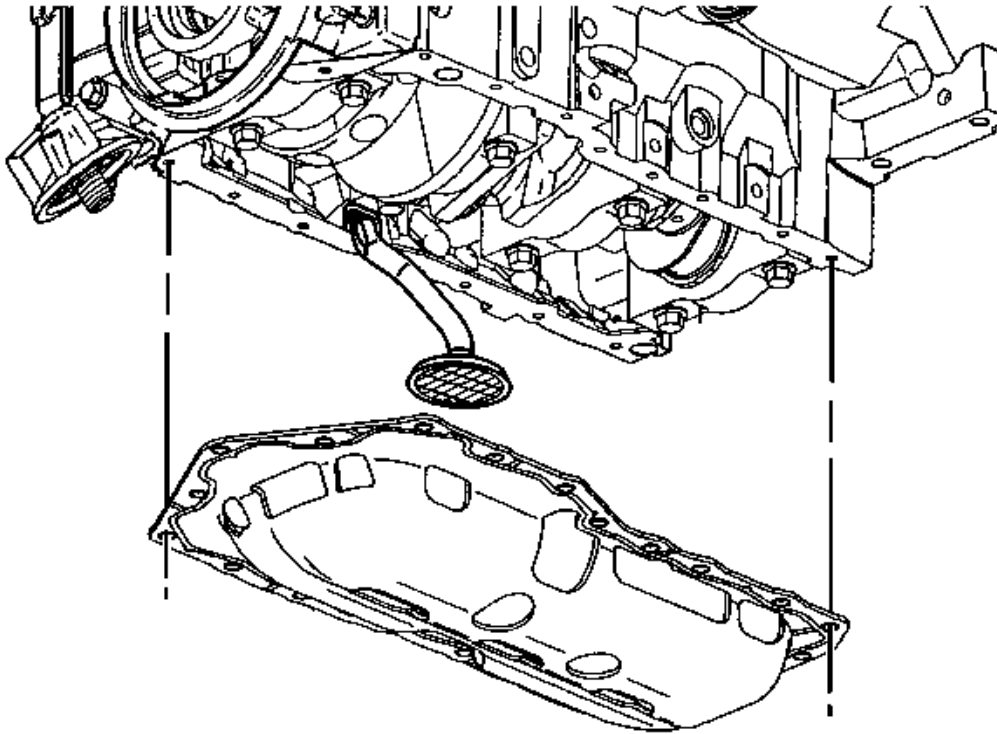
Installing Oil Pump Pipe Screen Assembly
